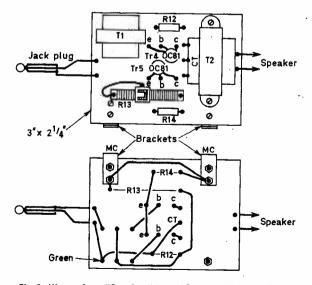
Views of amplifier circuit board. Care must be taken to ensure correct wiring of jackplug.
